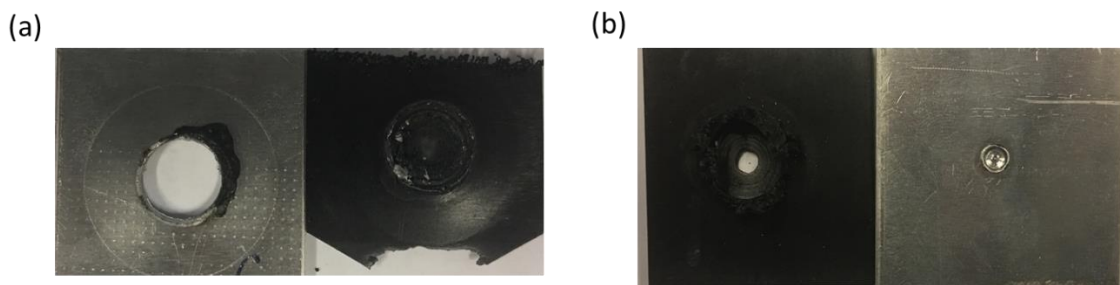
Fracture surface of different welding configurations (a) Aluminum on the top (b) Aluminum on the botto
